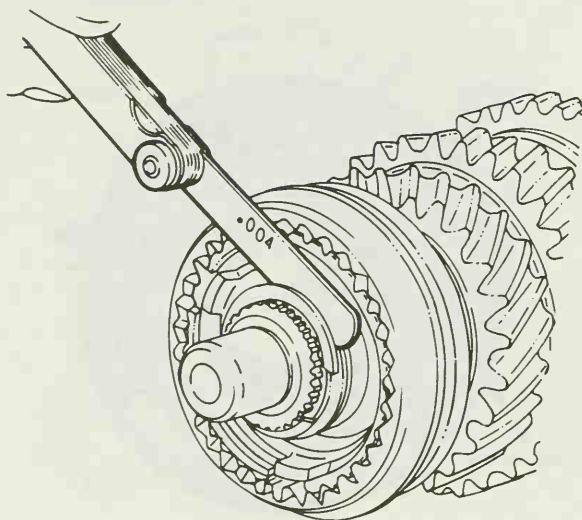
Measuring mainshaft or output shaft end play. (American Motors Corporation)
